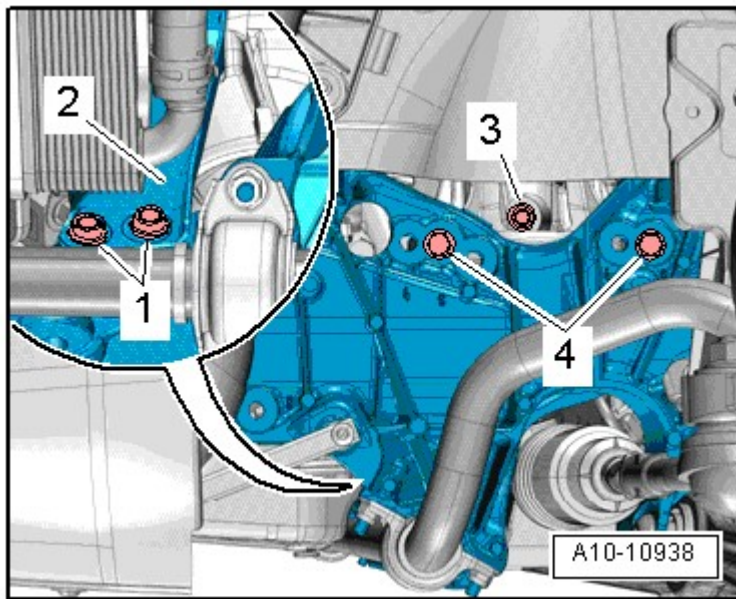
Identifying Left Engine Mount Bolts -1-, -3- And -4-
